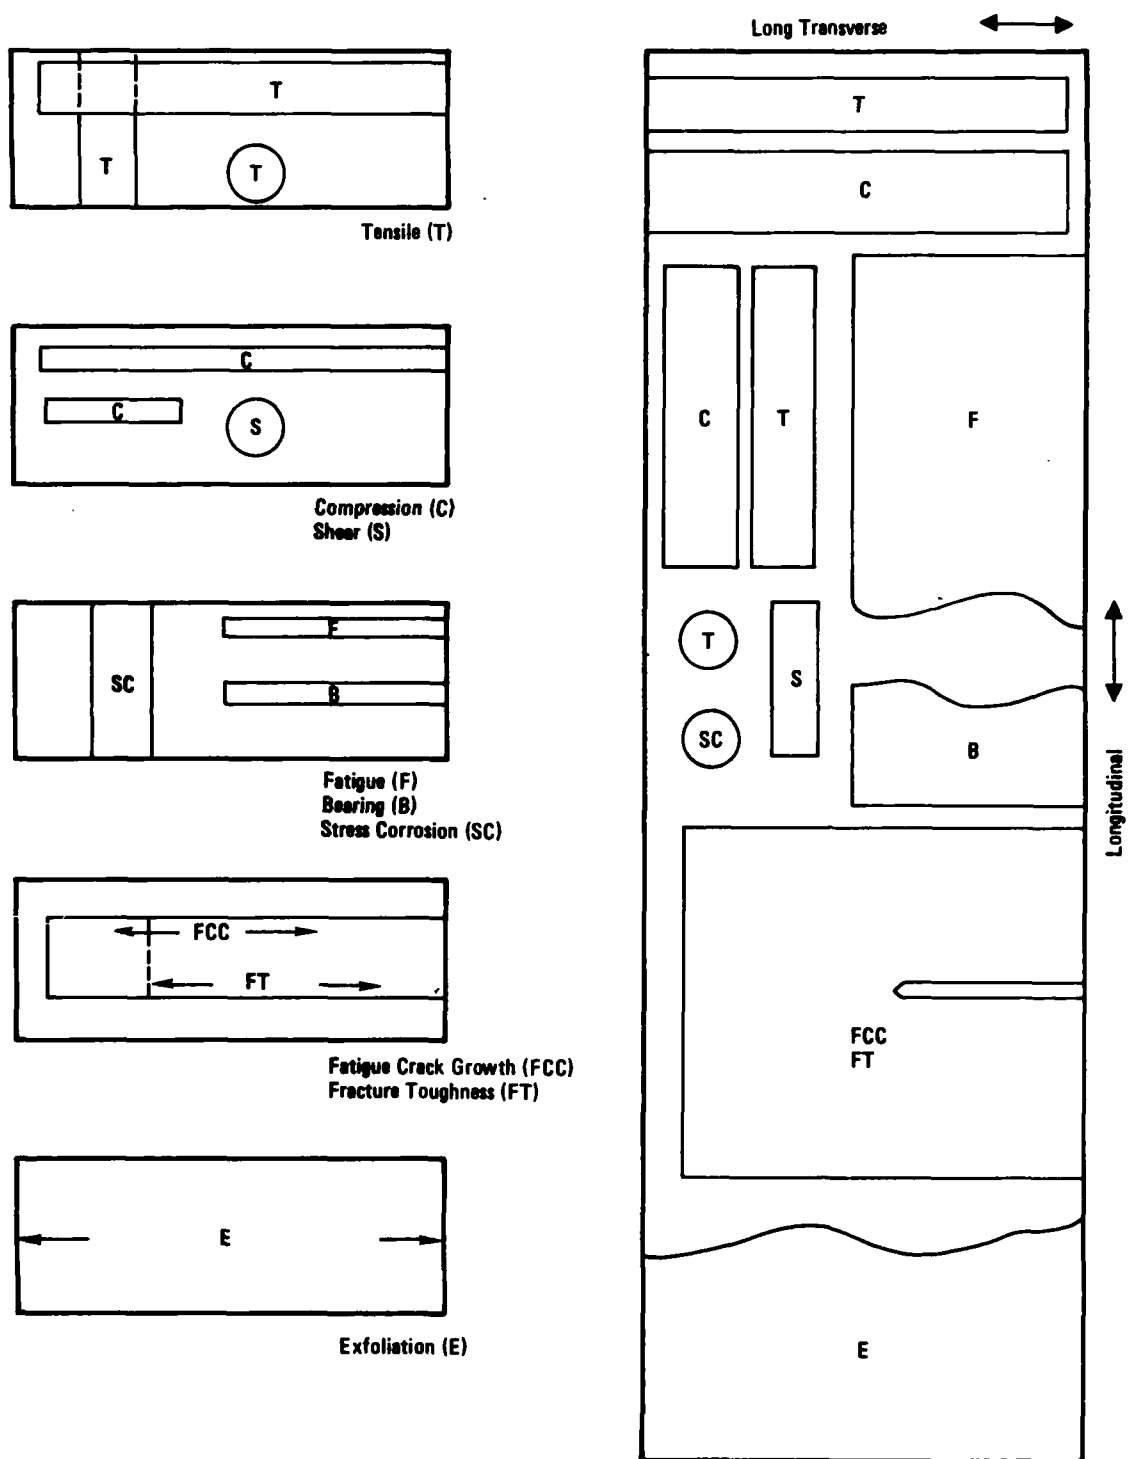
Schematic of test specimen layout for flanged cap - base, LS 13116. (Not to scale)
